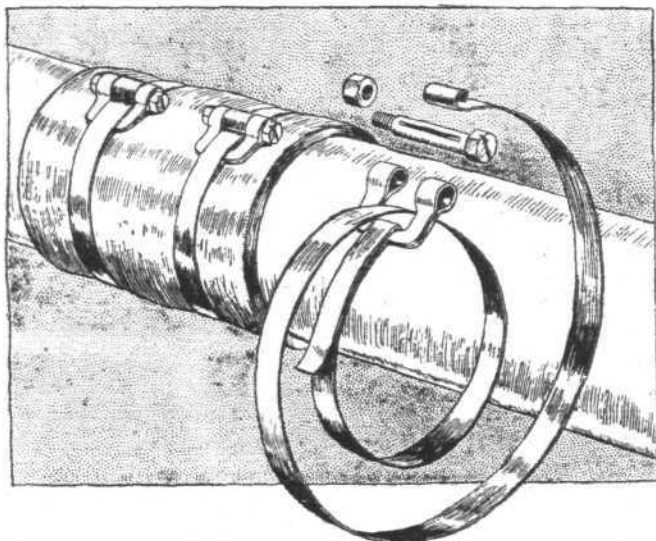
An ingenious steel band joint clip, used on the rubber connections of induction pipes and water joints.
